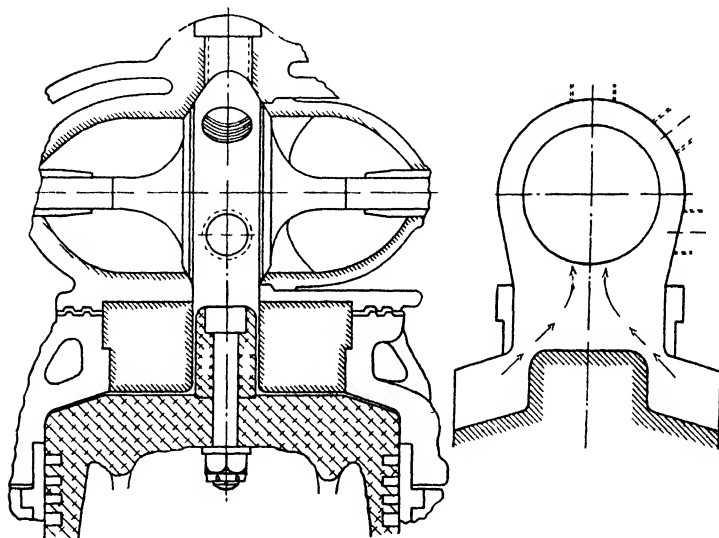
COMBUSTION-CHAMBER FORM OF N.A.C.A. TEST ENGINE.
